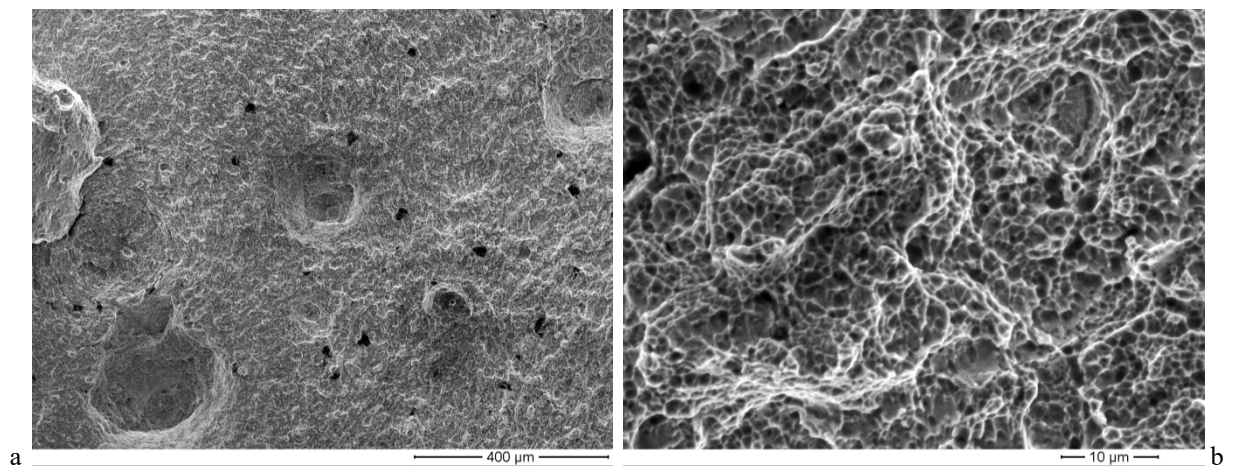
Fracture surface of a tensile specimen tempered at 200 °C . Electron microscopy. Central (normal) part. Ductile fracture (prevalent) with brittle islands (a); detail of ductile fracture area (b).
